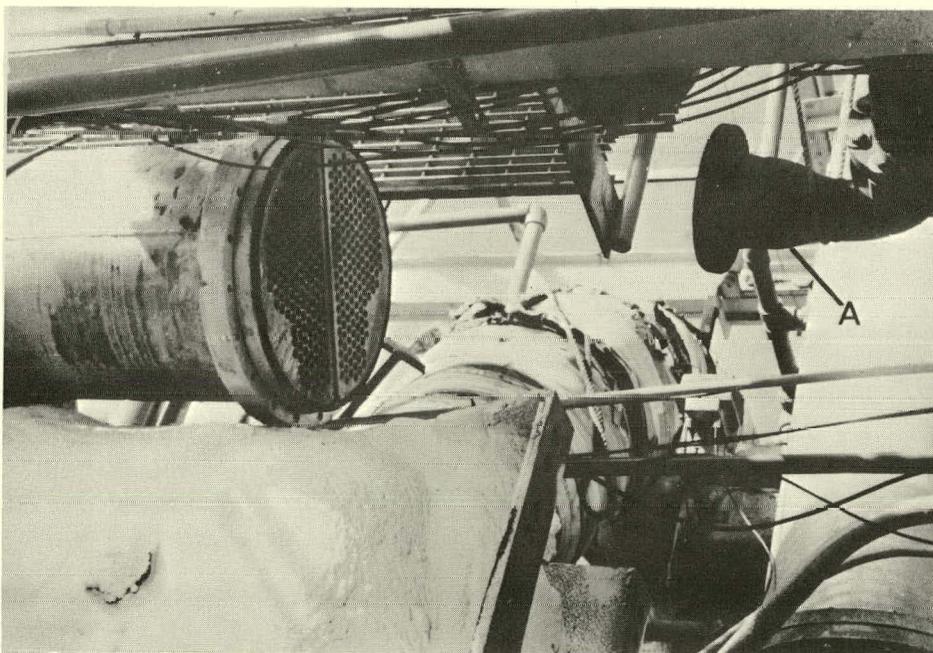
Overview of Inlet-discharge End of Heat-removal Condenser with Water Box Removed. Steel pipe section that supplied seawater to heat exchanger is designated by the symbol A.
